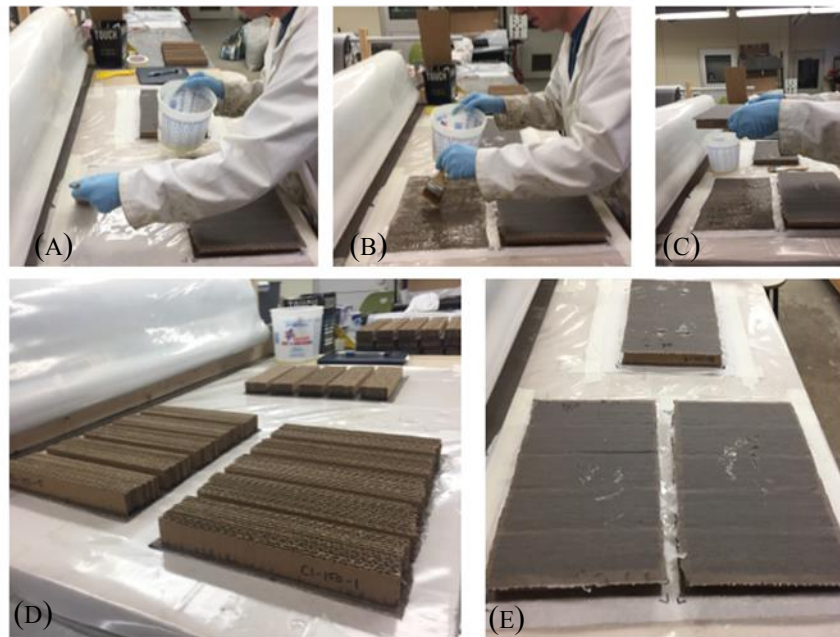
Fabrication: (a) Applying epoxy; (b) saturating flax fabric; (c) placing cardboard cores on saturated fabric; (d) First side complete; And (e) Both sides complete.
